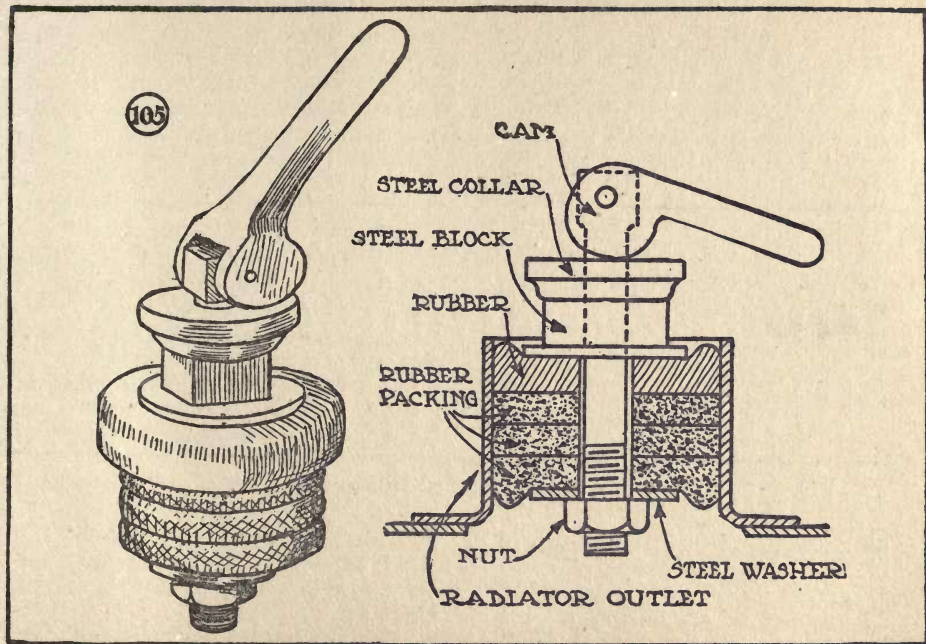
Rubber compression plug used for making tight joints at inlet and outlet pipes and filler cap. The left view shows the cam released and at the right is a sectional view with the cam down.
